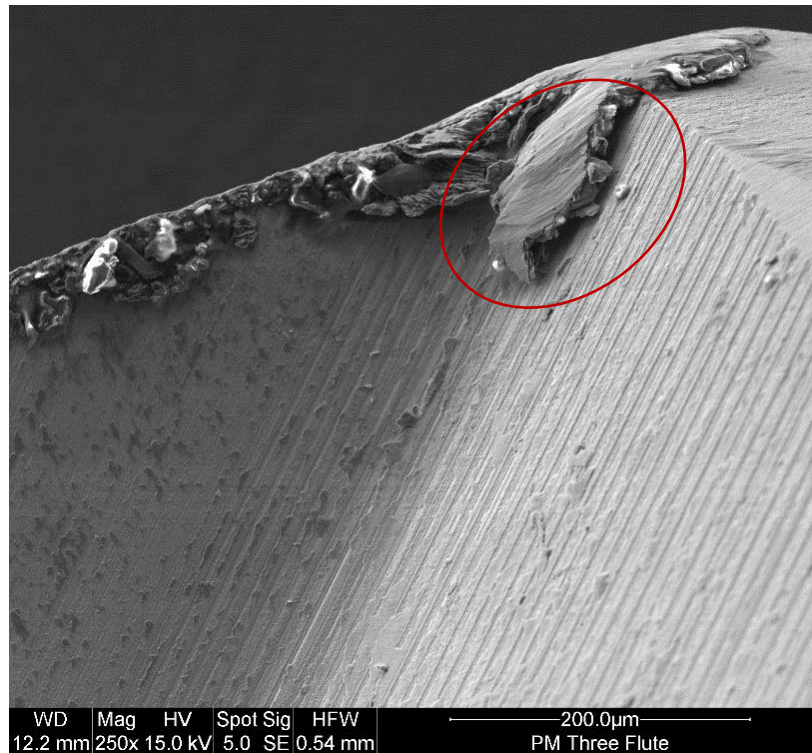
250x SEM flute view of the three flute drill bit cutting edge after drilling 60 holes in PM titanium.
